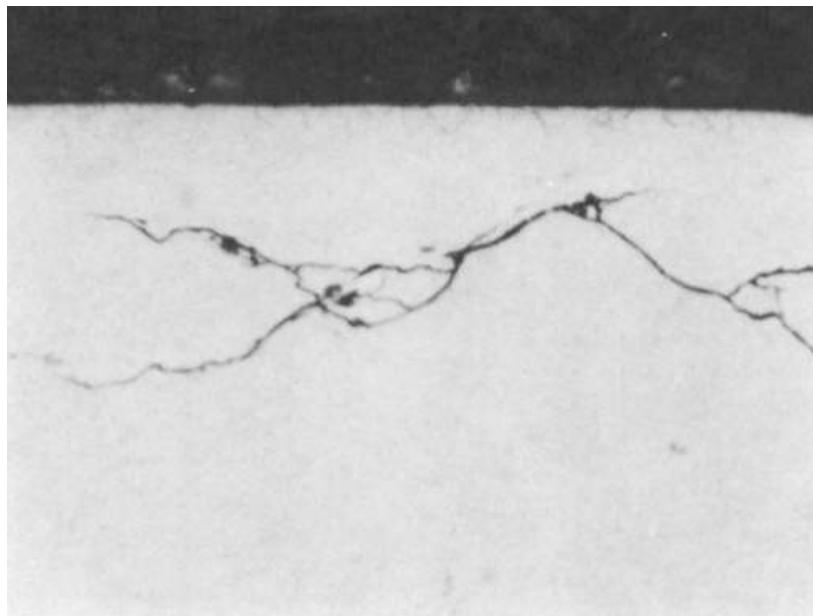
Gear tooth section showing RCF subsurface cracks. Source: [39].
